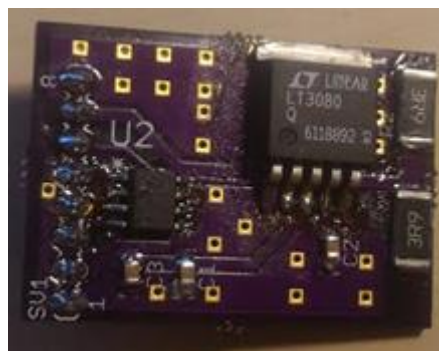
Adjustable Supply Assembled on Printed Circuit Board
